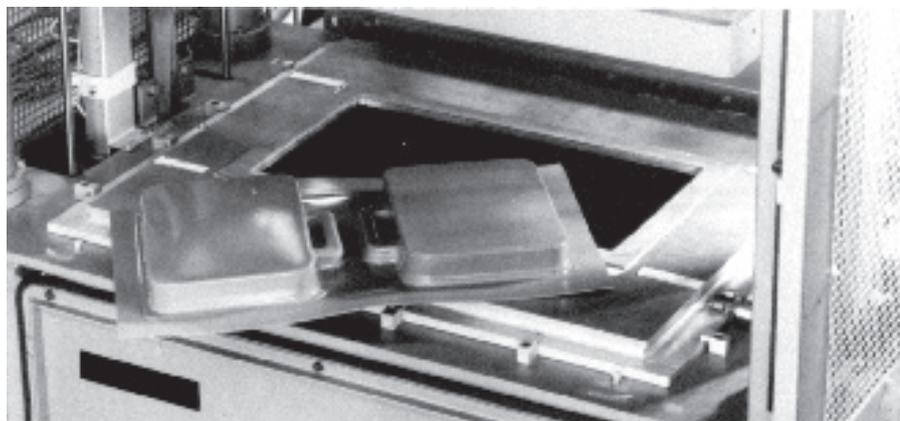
Thermoforming suitcase components on a vacuum-forming machine
